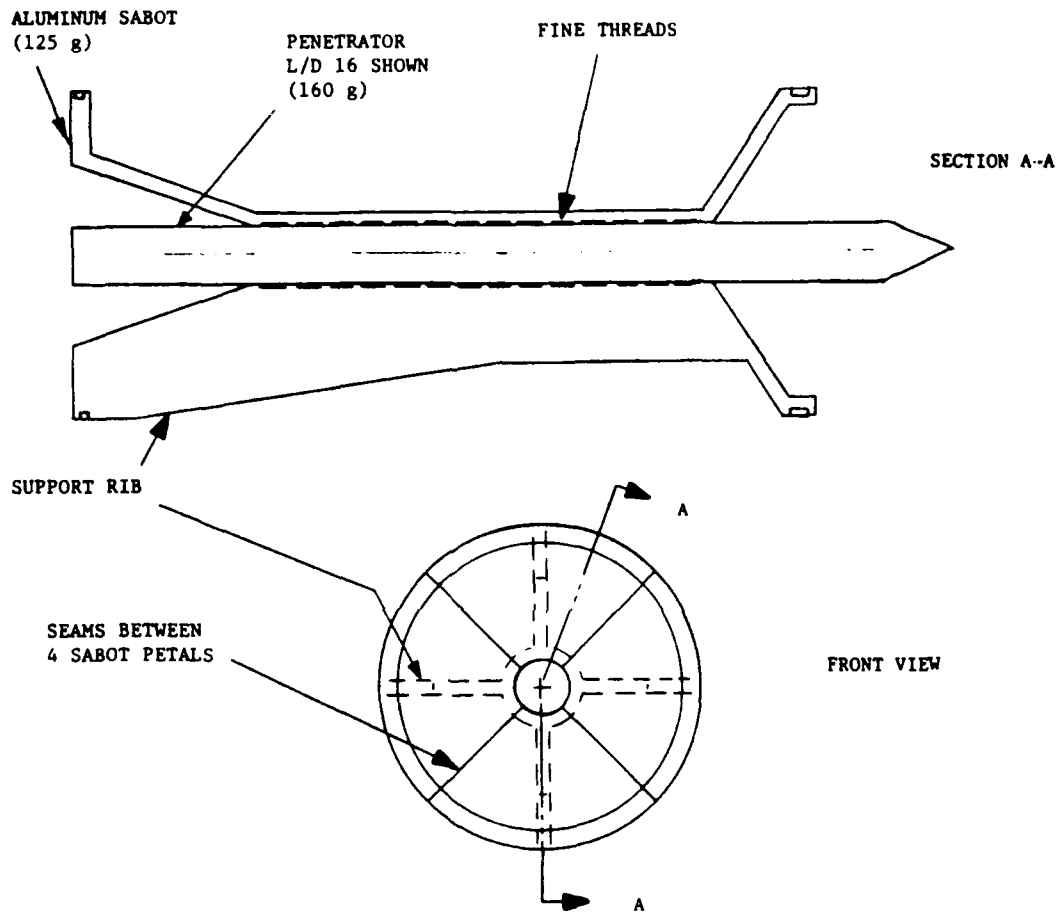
Sabot/Penetrator assembly with a four-piece aluminum sabot, and a tungsten penetrator. Assembly is pushed on the annular surface at the rear of the sabot. The sabot grips the rod with ridges along the rod's center section.
